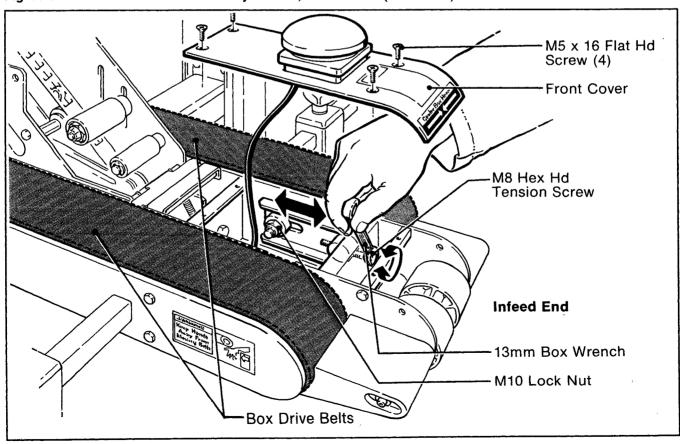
Box Drive Belt Tension Adjustment, Upper Belts (Infeed End)
